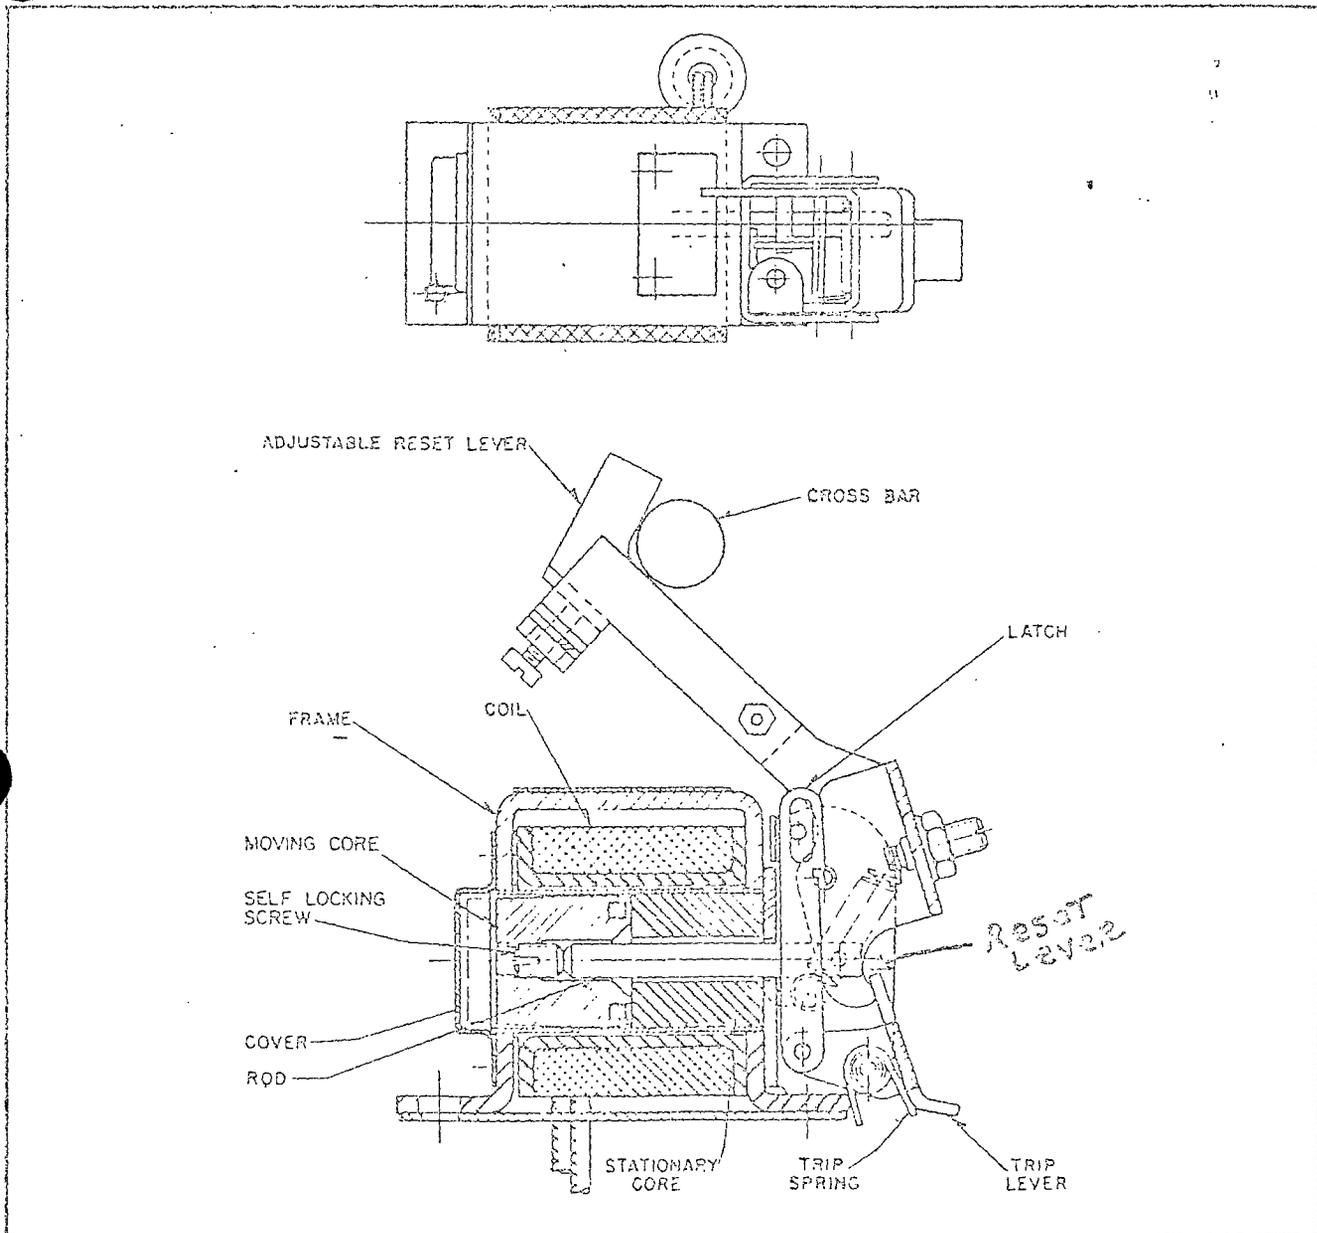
Undervoltage Trip Attachment - Construction Details
